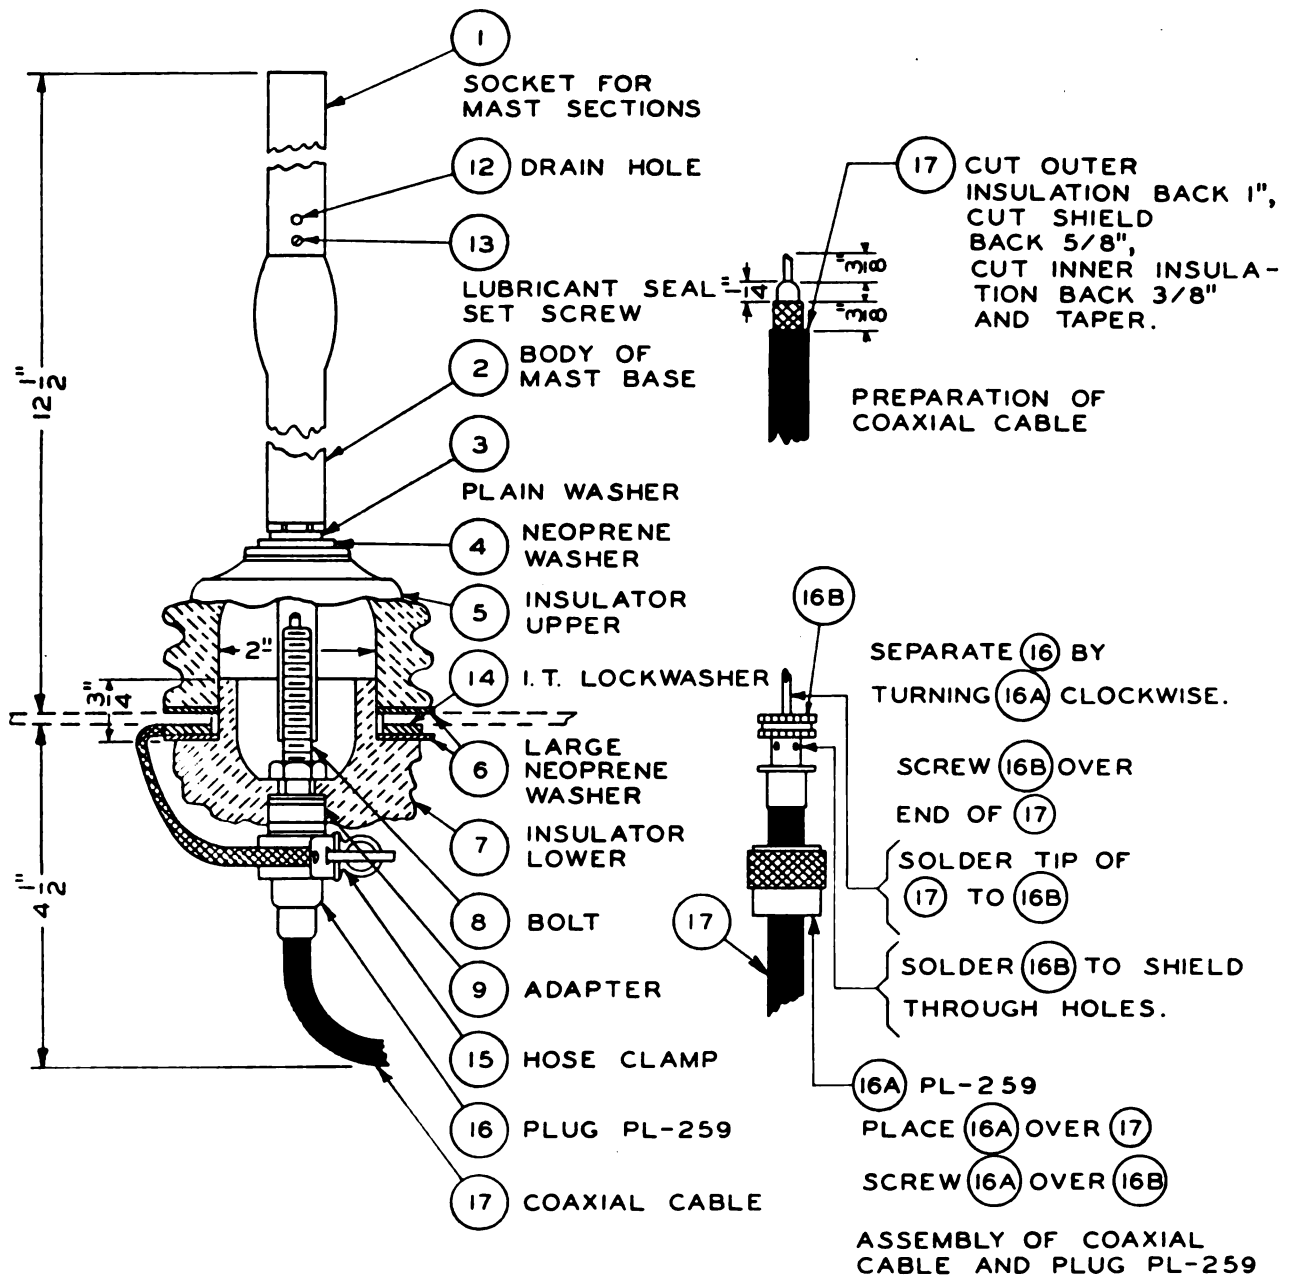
Mast Base AB-15/GR, assembly for coaxial lead-in.
